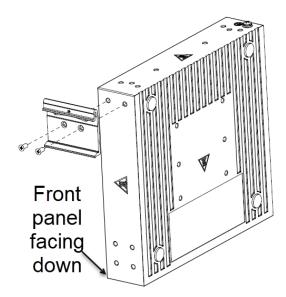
Din Rail Mounting Option 2: Attach the Bracket
